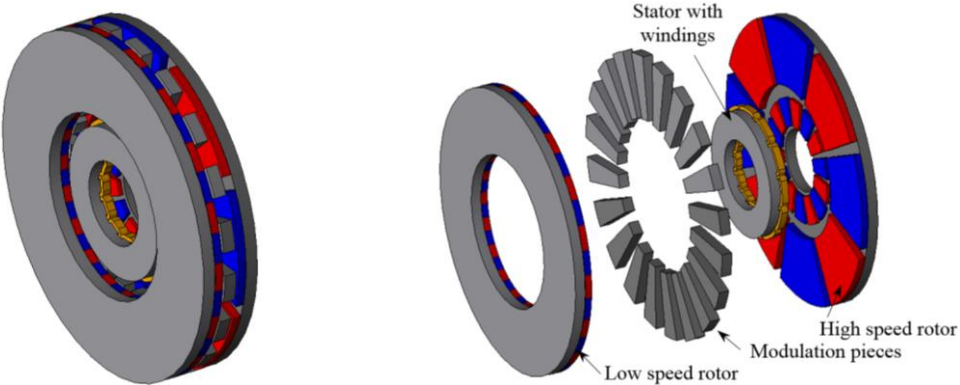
Magnetic geared machine presented in [JOH17].
